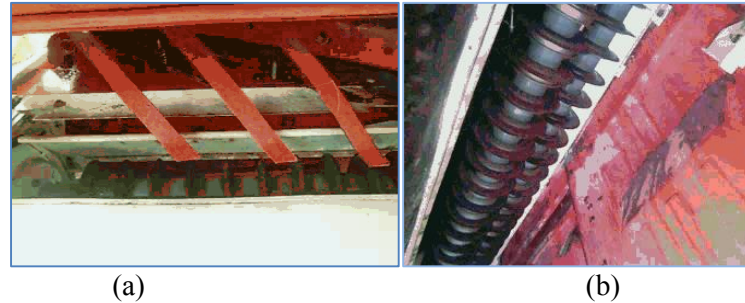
Cutting blades of combine machine, (a) front view (b) bottom view.
